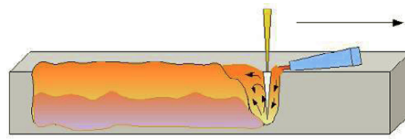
Sketch of laser welding with filler wire of copper
